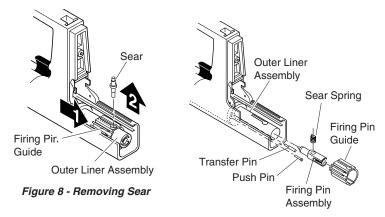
Removing Firing Pin Guide, Firing Pin Assembly, Sear Spring, Transfer Pin, and Push Pin
